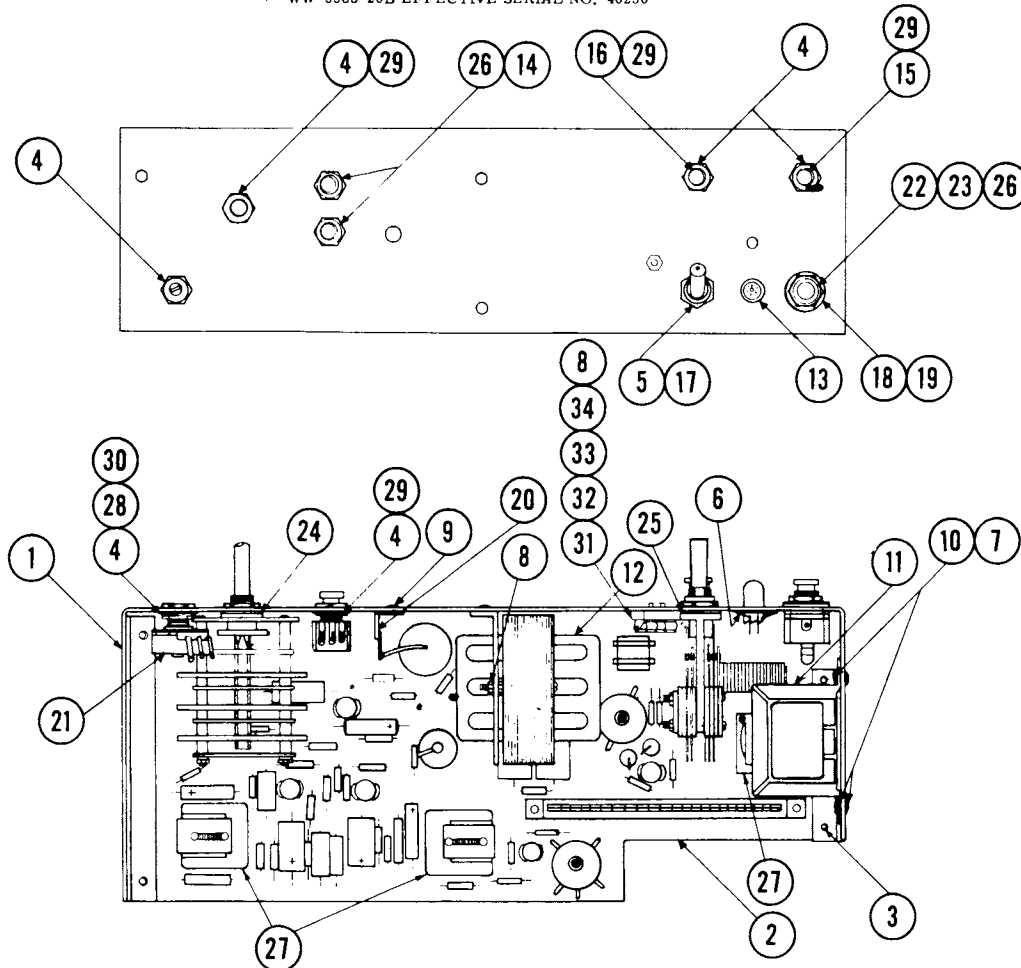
Assembly, Chassis, WW-4698-1 (Part of Assembly, Figure 20).
